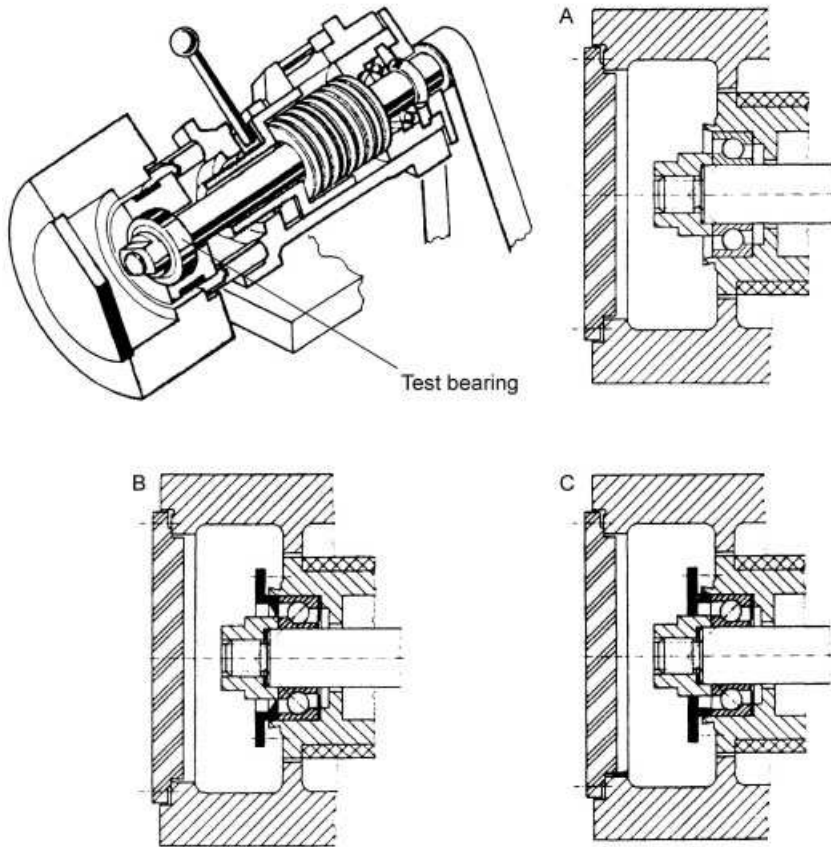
Schematic diagram of the FE9 test head (grease test) and cap assembly. A. Open cap assembly, B. Covered cap without grease reservoir assembly, C. Covered cap with grease reservoir assembly.
